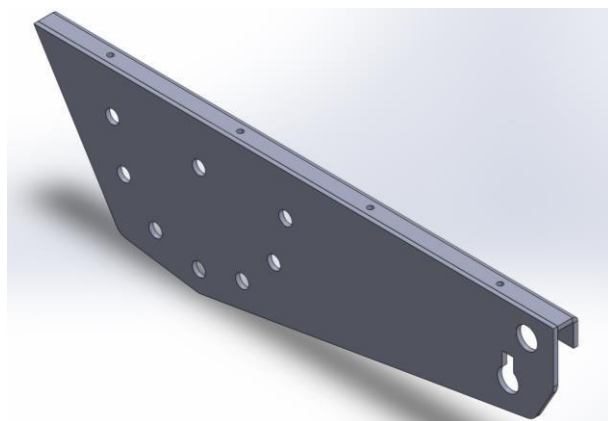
shows the design of the right piece that connects the perforated platen to the support structure (base) by 4 M4-0.7 grade 8.8 hex screws with natural black finish, on the top of the piece.
